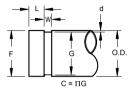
Roll grooved-end dimensional reference points for Table 1
